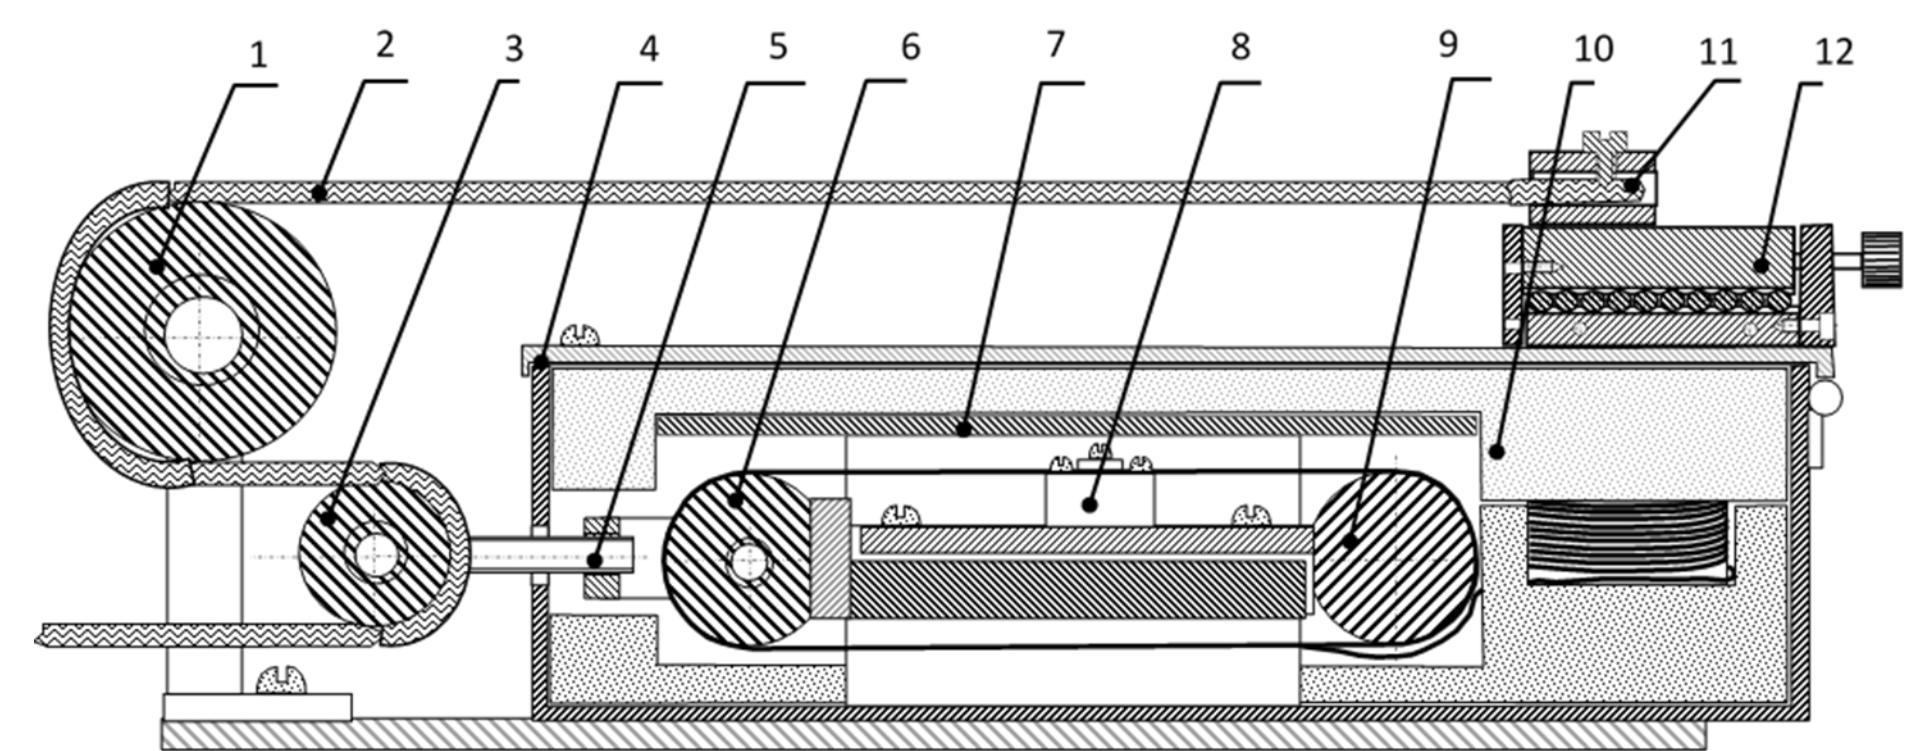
Mechanical design of fiber-optic Mach-Zehnder strainmeter. 1 - casing; 2 - cable; 3 - pulley 2; 4 - casing; 5 - p-shaped bracket and rod; 6 - movable cylinder of the fiber optic coil; 7 - protective plate; 8 - fiber clamp; 9 - cylinder connected to the body; 10 - foam filling; 11 - cable fastening; 12 - optical translator.
